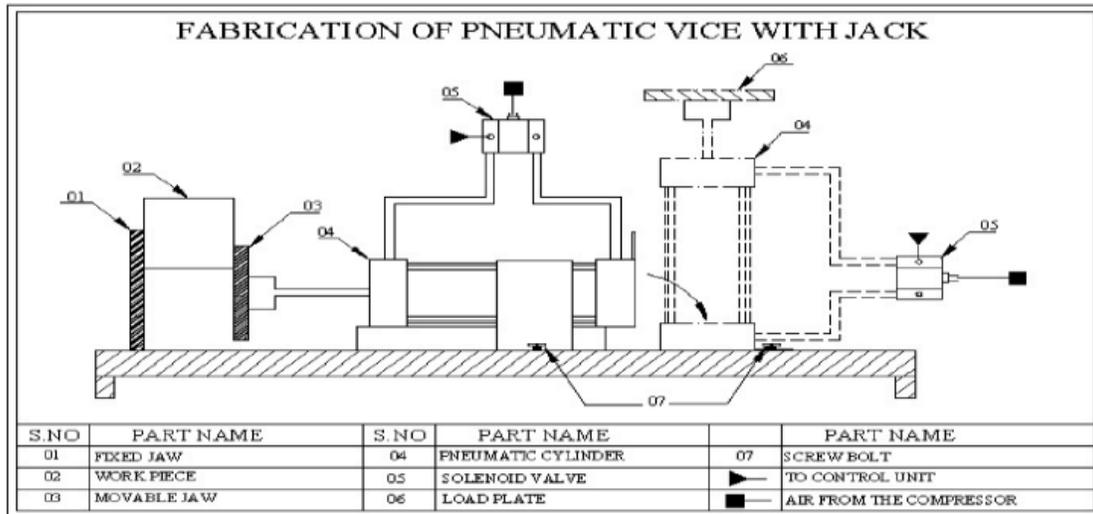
2D CAD Drawing of Pneumatic Vice and Jack
